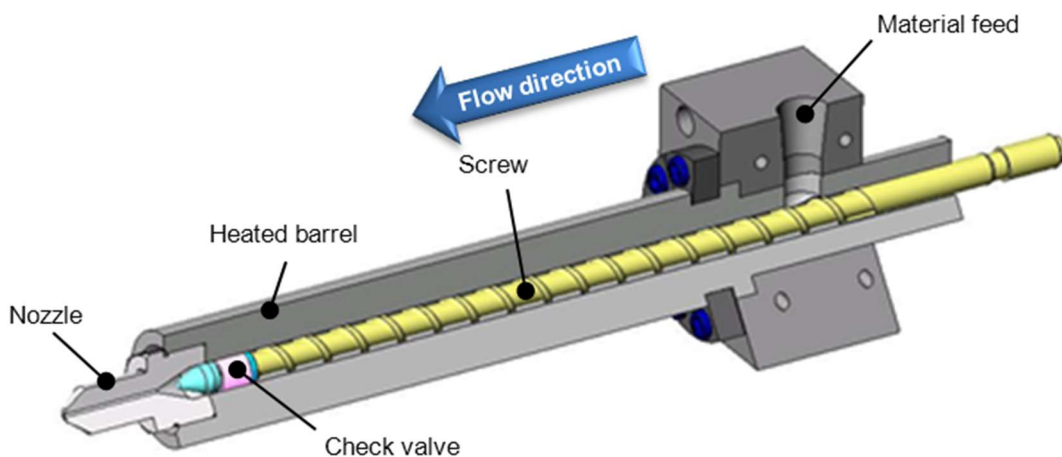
Single-screw plasticizing system for injection molding machine.
